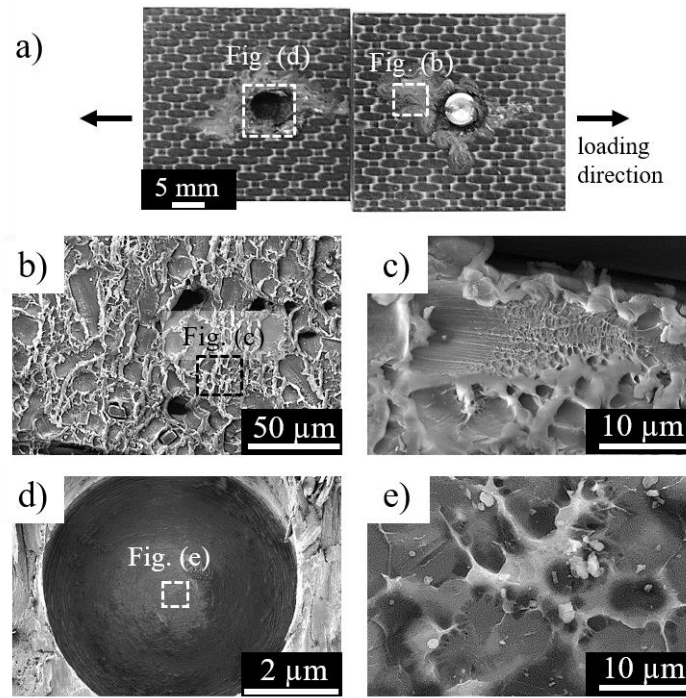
a) Overview of a high cycle fatigue fracture surface (456,824 cycles to failure); SEM micrographs of: b) squeezed material fracture surface with hackle formation; c) detail of hackles; d) the hole in the lower composite plate left after the joining process; and e) details of the plastically deformed matrix in the composite hole.
